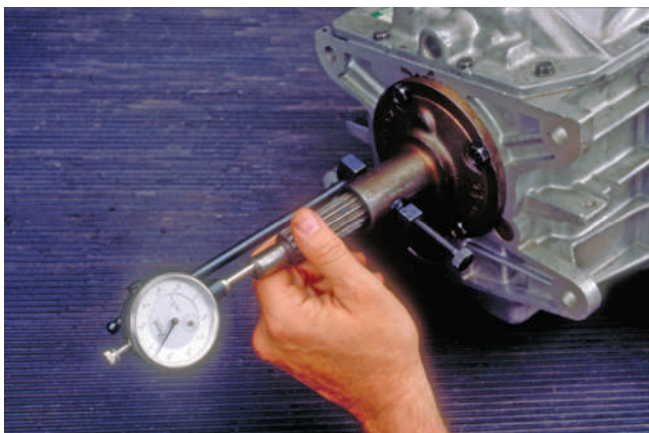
Use a dial indicator to measure the end play of the shafts before disassembling the unit.
